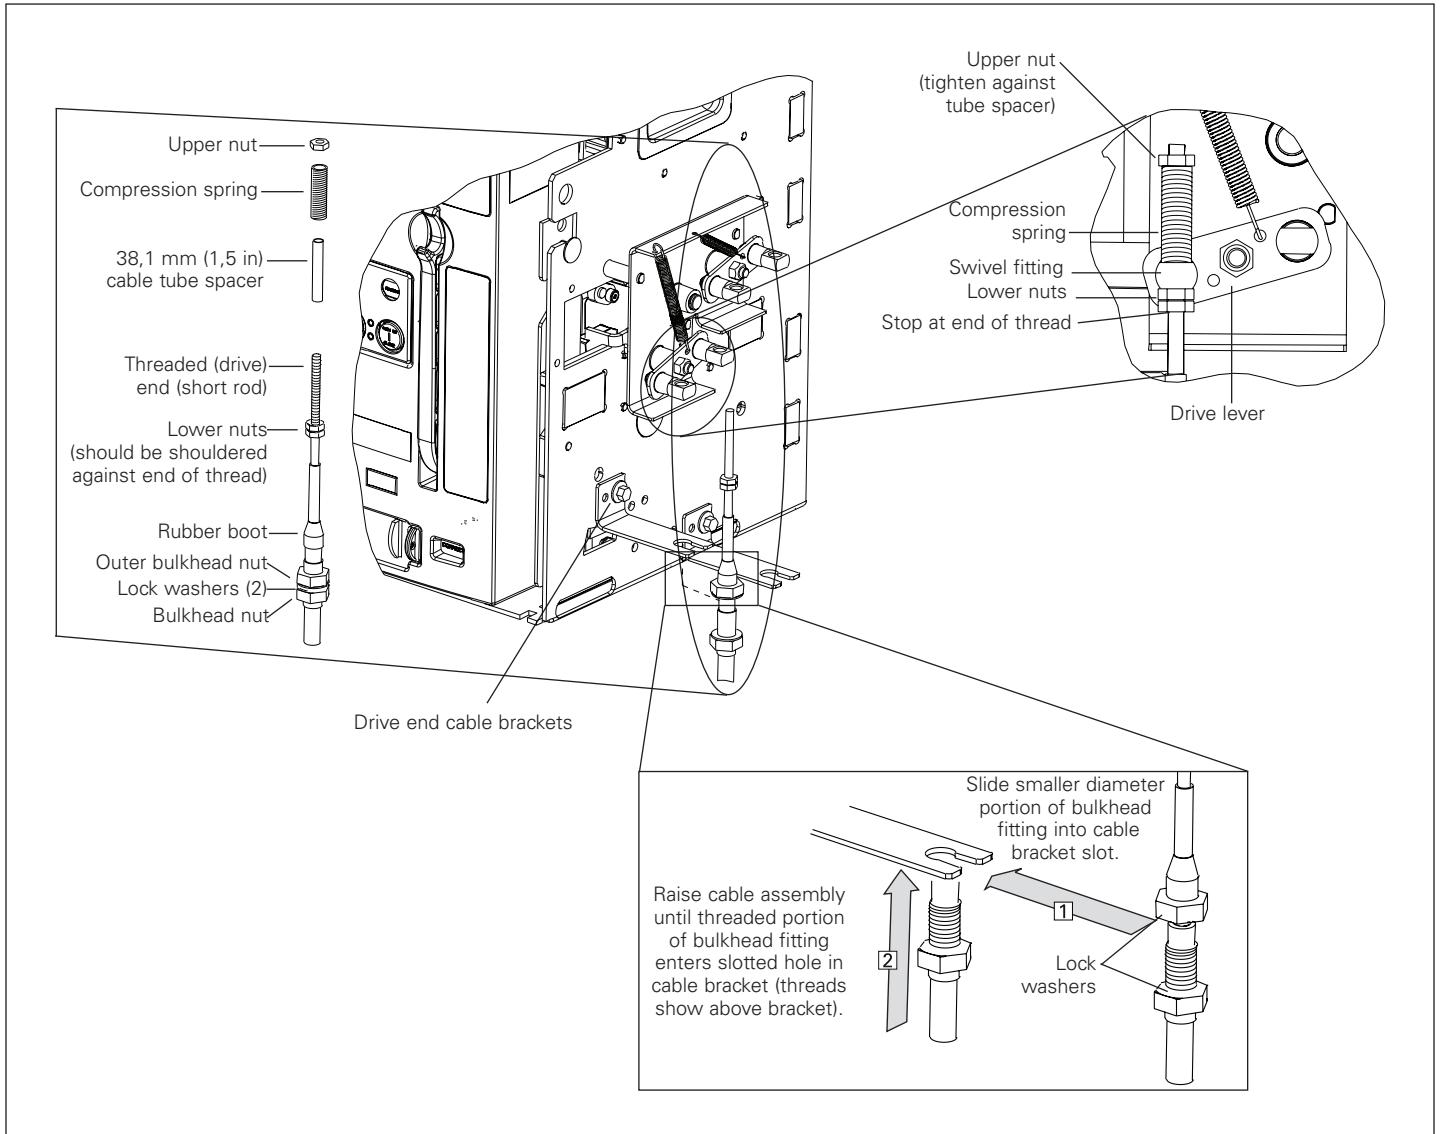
Details for Step 6: cable assembly drive (short rod) end mounting component identification, mounting cable assembly in cable bracket, and cable rod attachment to drive arm
